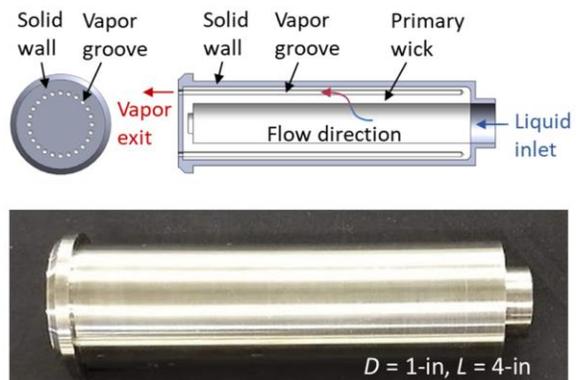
(top) CAD rendering of the 3D printed evaporator, and (bottom) a photograph of the 3D printed evaporator.
